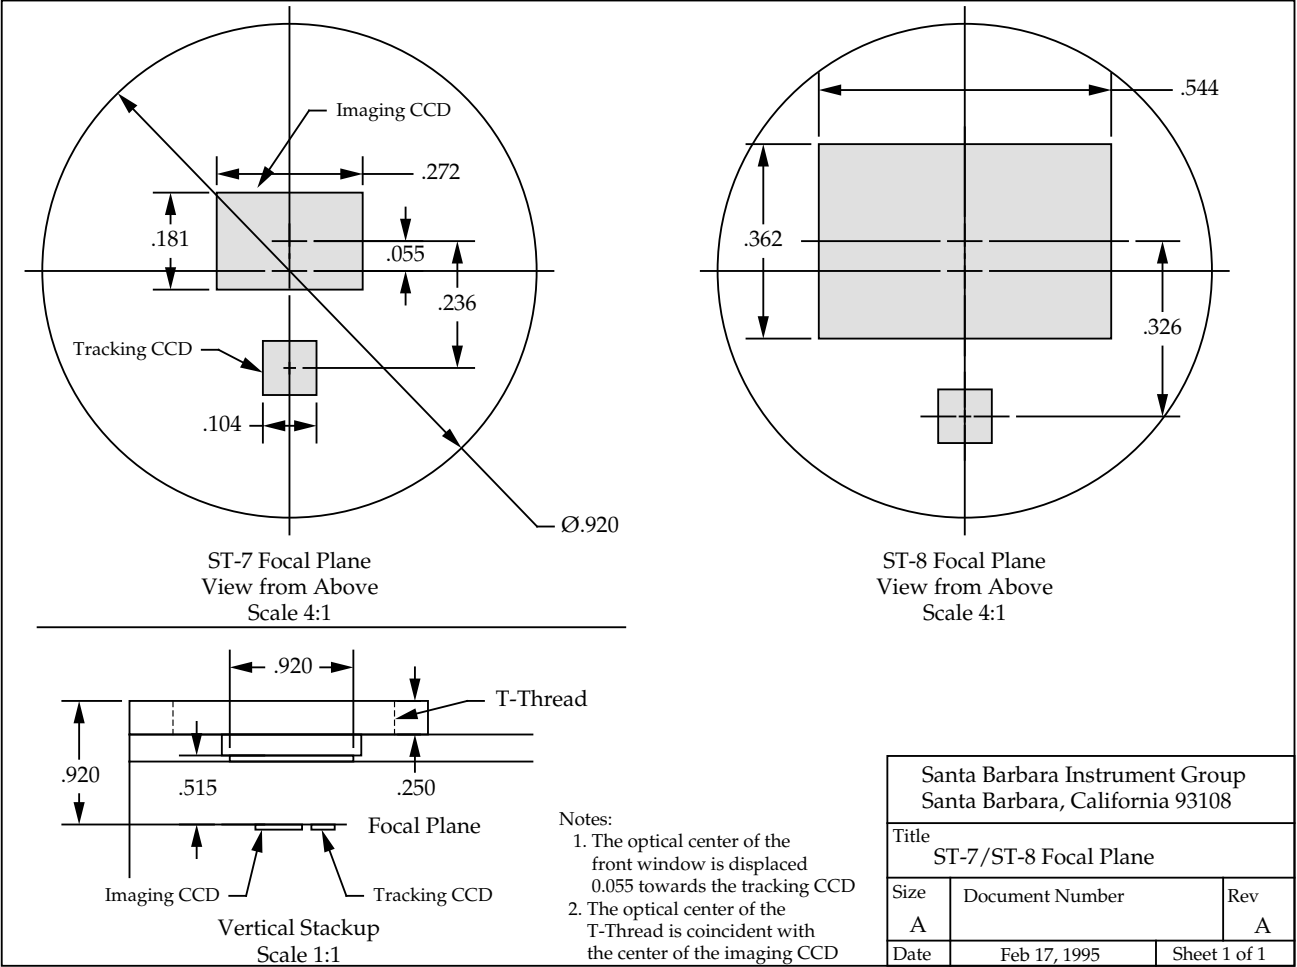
Technical drawing of the ST-7 with dimensions concerning its focal plane. If not denoted otherwise the dimensions are given in inch. For further details see [122].
